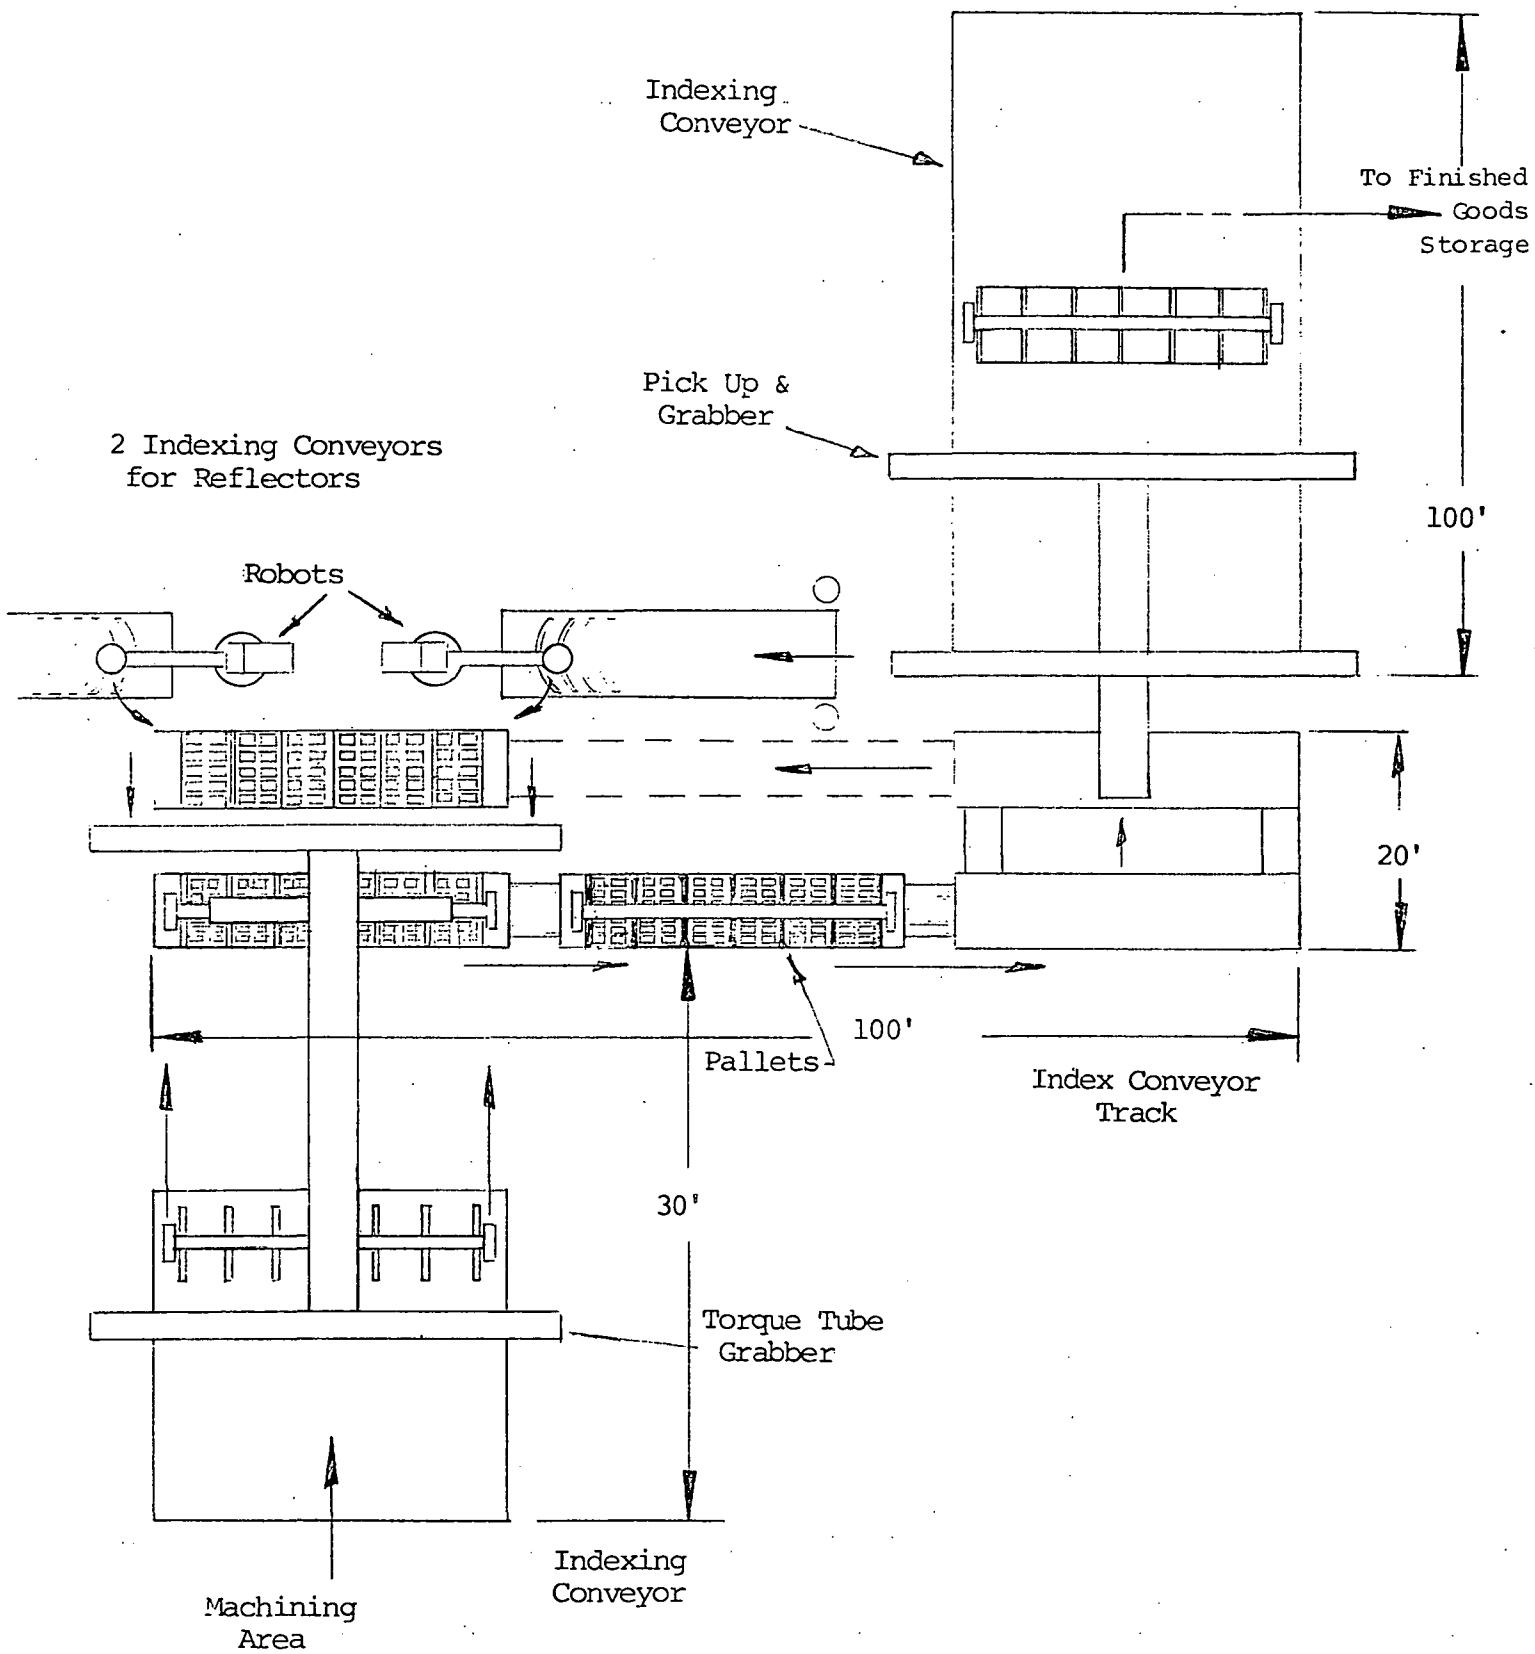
REFLECTOR TORQUE TUBE ASSEMBLY
